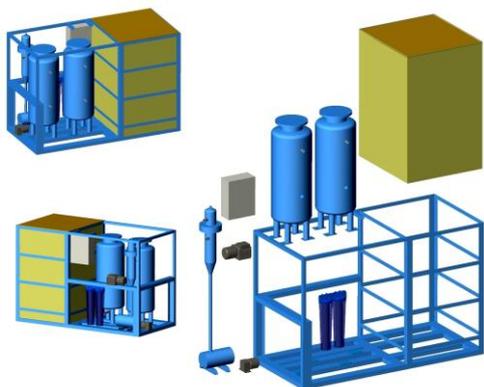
Modified product assembly (left side, above and below) and exploded view (right side)
